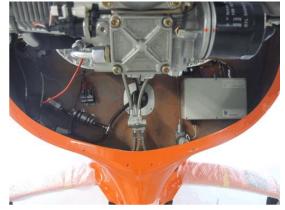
Rear Wall 'Installation Wall' (Fire Wall removed)
